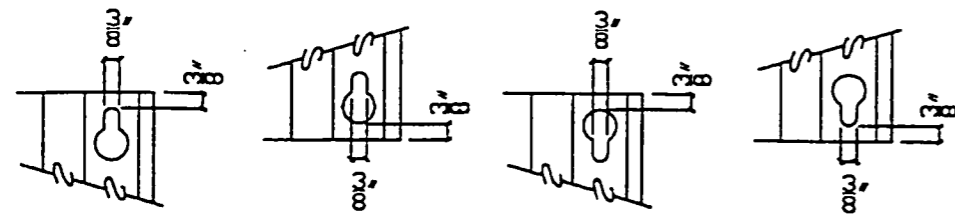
, 7, 9, 10 AND 11 ON SHEET 2
